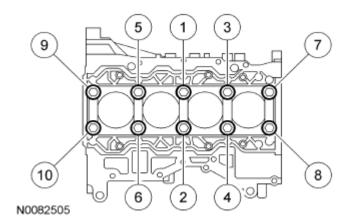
Identifying Main Bearing Beam Bolts Tightening Sequence Courtesy of FORD MOTOR CO.
